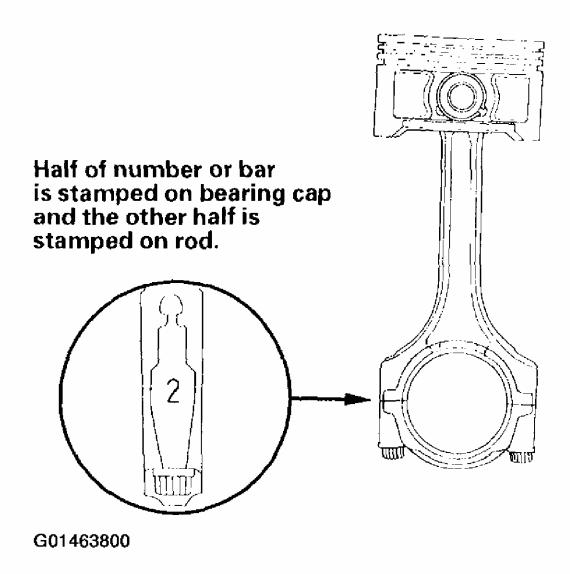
Locating Rod Bearing Code Courtesy of AMERICAN HONDA MOTOR CO., INC.
